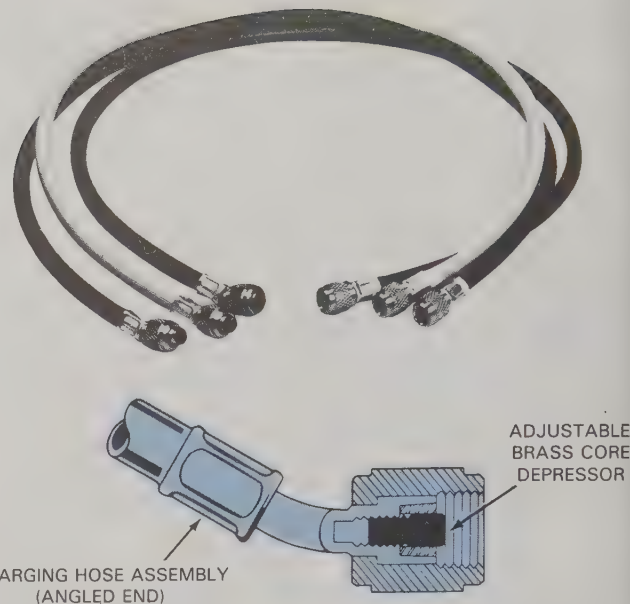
Refrigeration hose is designed to withstand high pressures and temperature extremes. The straight connector attaches to the manifold body; the angled connector to the service valve or Schrader valve.
